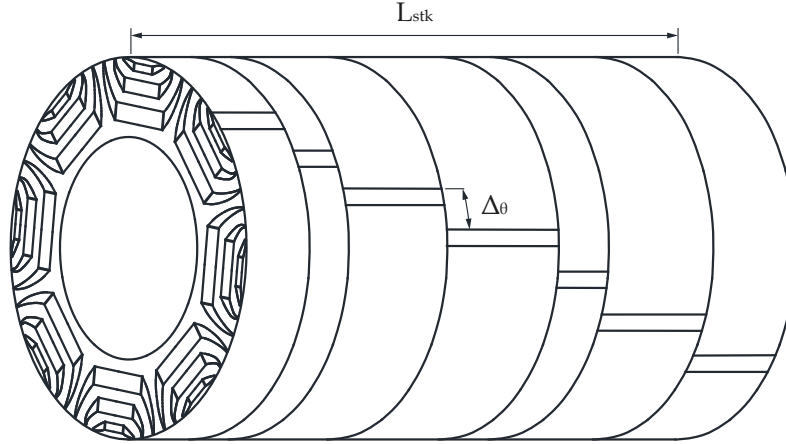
Rotor skewing of a rotor which has been splitted into $m = 7$ parts with an angular rotor skewing $\Delta\theta$ between two consecutive sections
